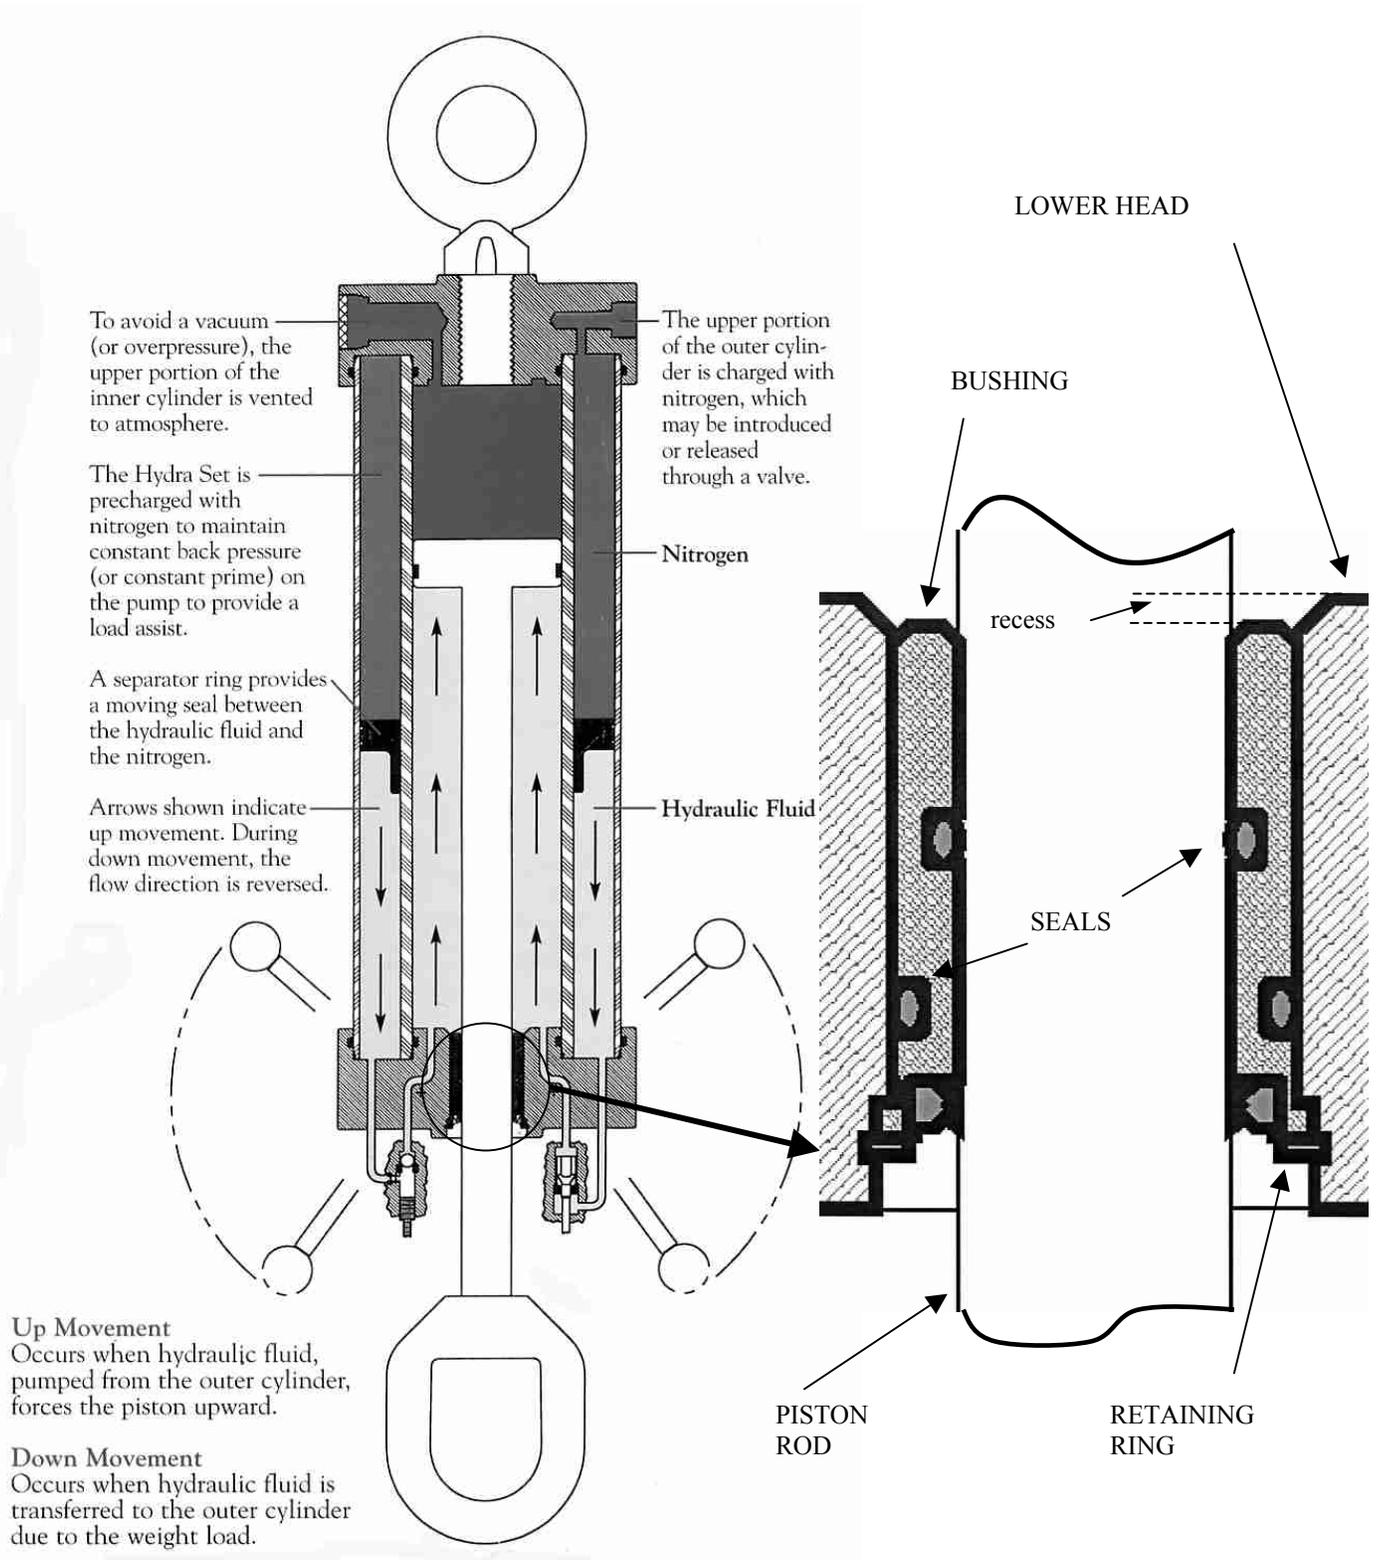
A cross section of the Hydra Set that explains its operation. An expanded view on the right shows the details of the retaining ring assembly. Note that the bushing is located below (dashed lines on the expanded view) the inner face of the lower head. This design feature assures that the piston never makes a physical contact with the bushing when it bottoms out against the internal face of the lower head.
